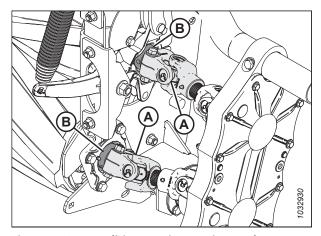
Conditioner Drive U-Joints and Conditioner Roll Right Bearings
